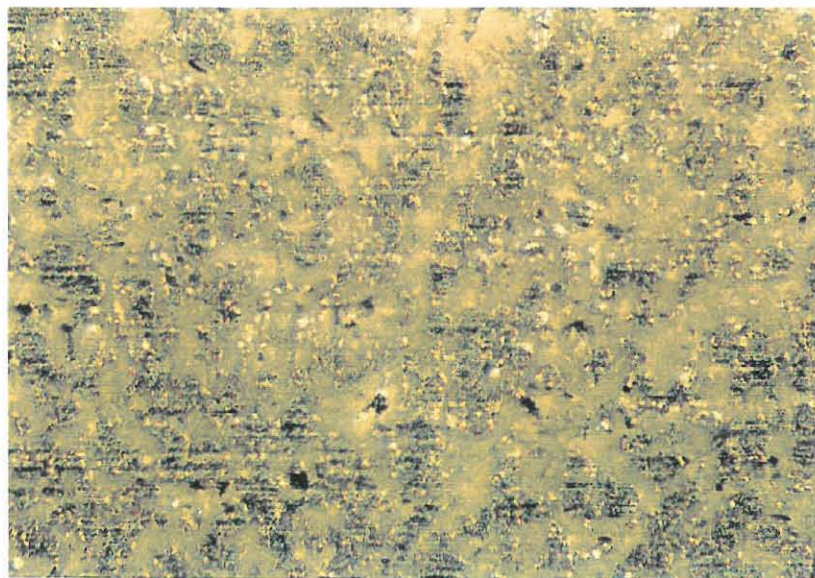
Surface Detail of an Un-Plated Aluminium Epoxy Insert
